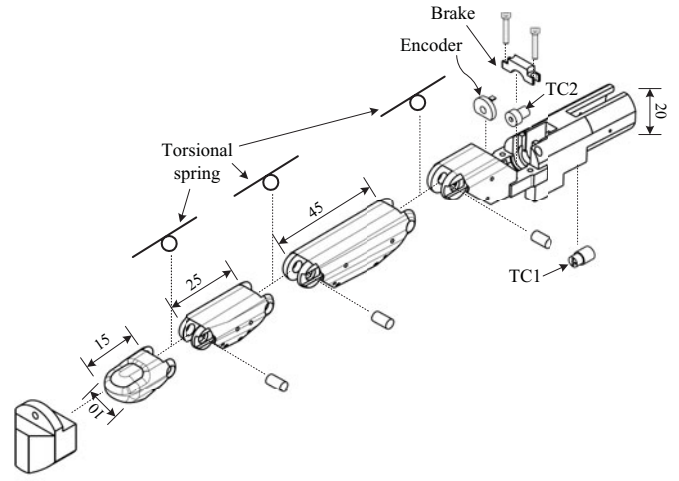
Mechanical drawing of a dual-mode robot finger.
